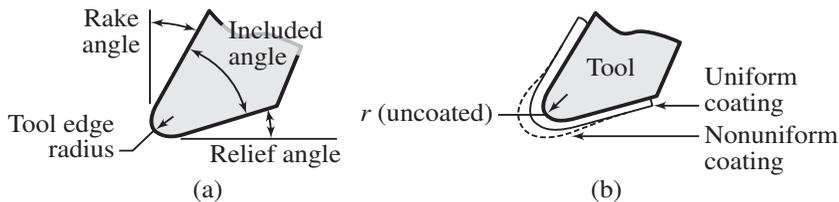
(a) Tool geometry, and (b) change of tool edge radius due to coating.
